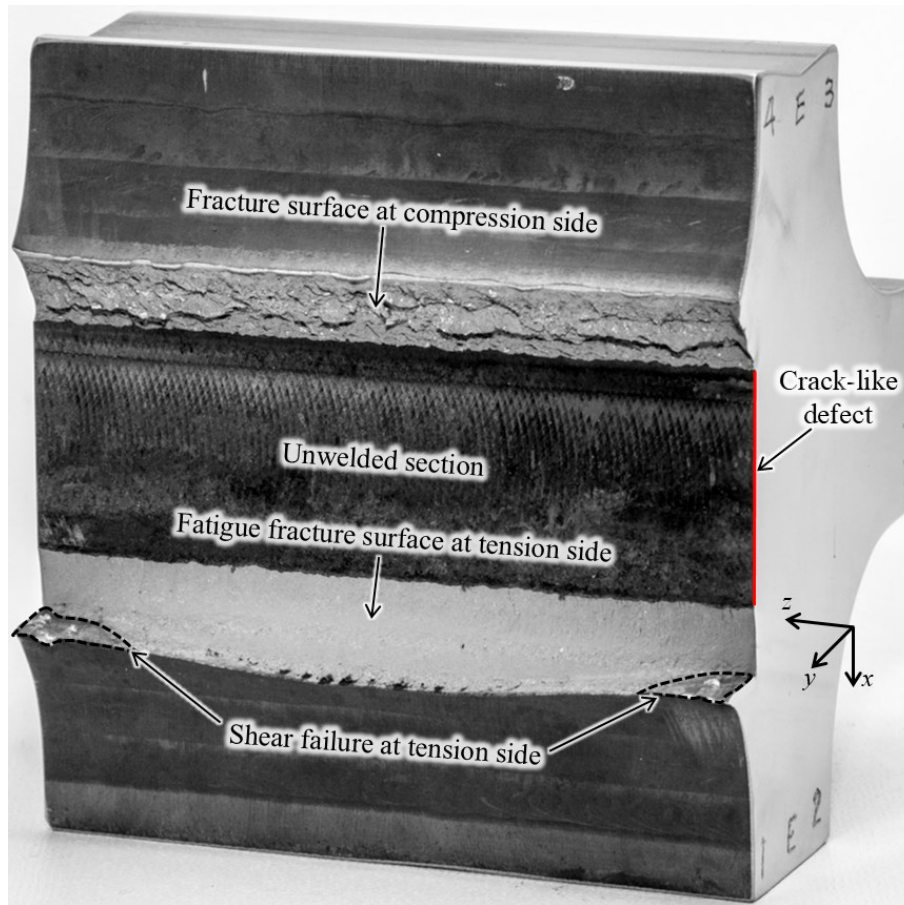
Welded joint of T3 after final failure at the weld root
